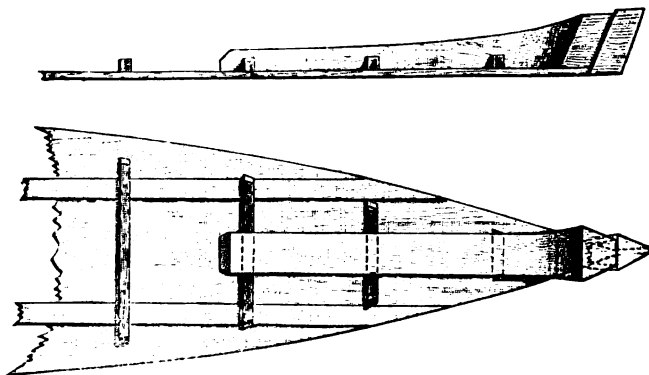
STEM-PIECE FIXED TO FLOOR (Surface and side-view)
